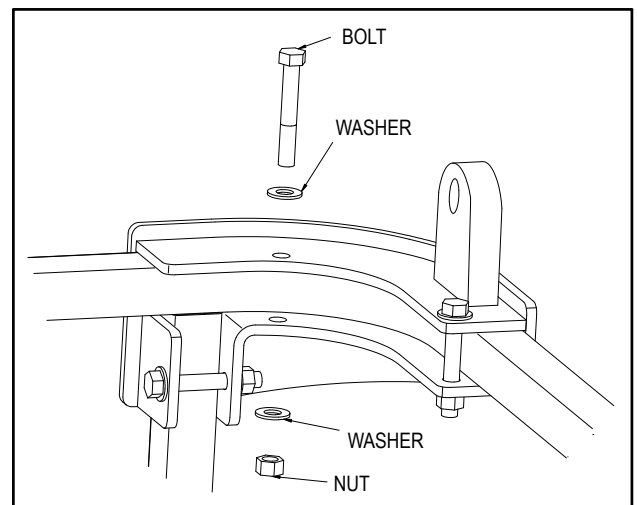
Bolt-On External Fall Arrest Cable Tension
